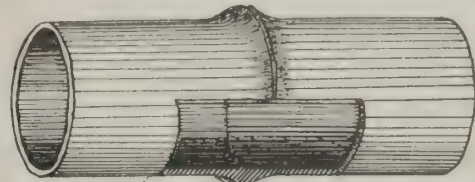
AN ELECTRICALLY WELDED TUBE.
